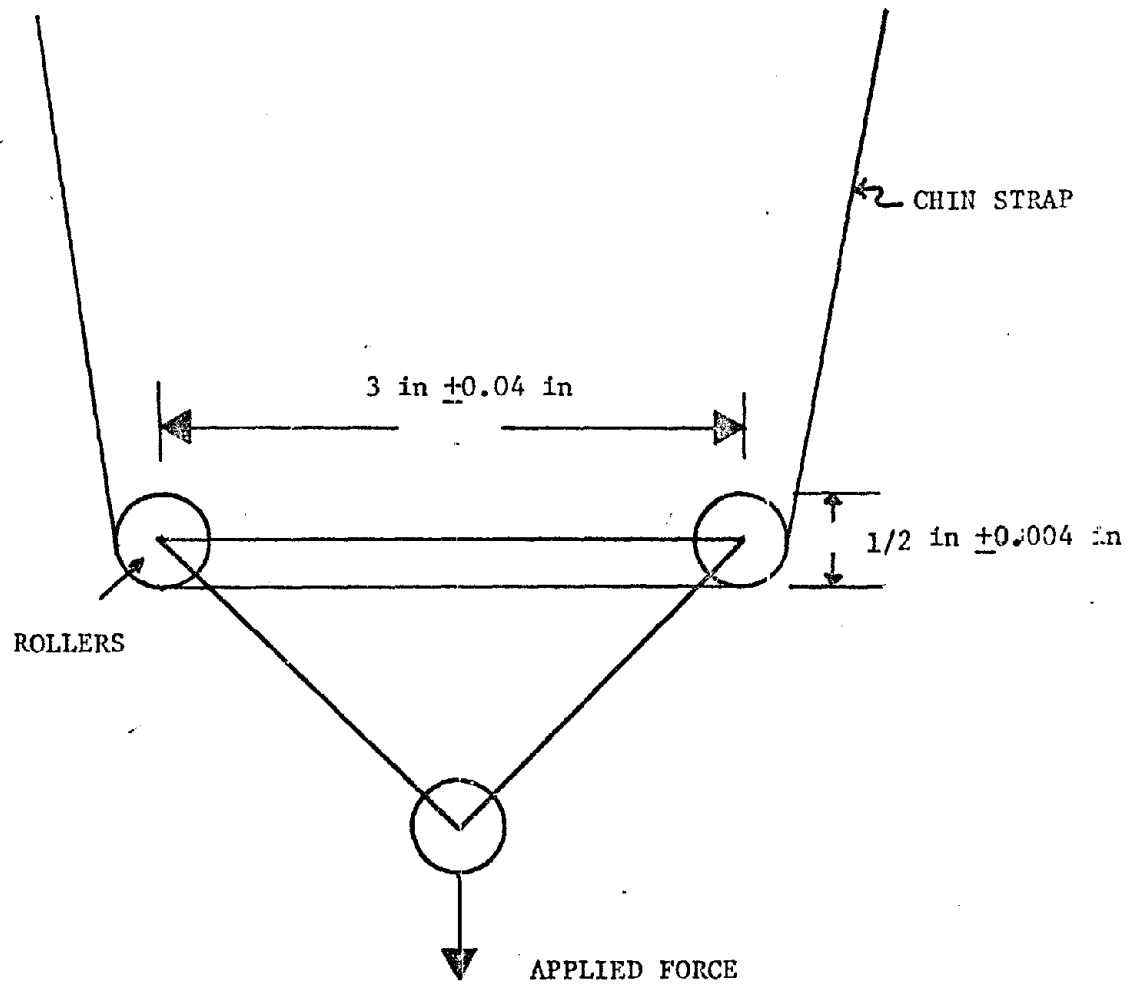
STANDARD MECHANICAL CHIN STRUCTURE
